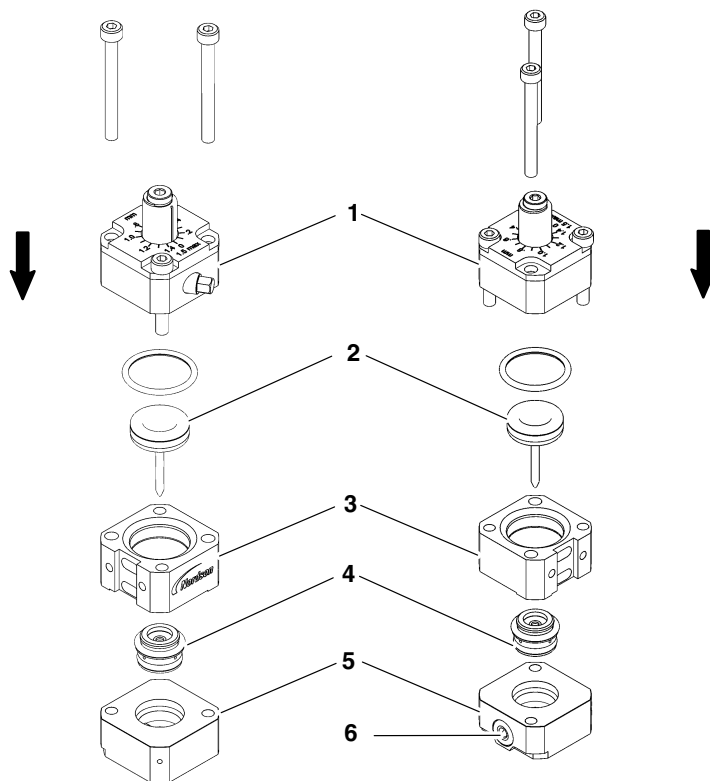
Module disassembly (left-side image: front iso view; right-side image: back iso view)
